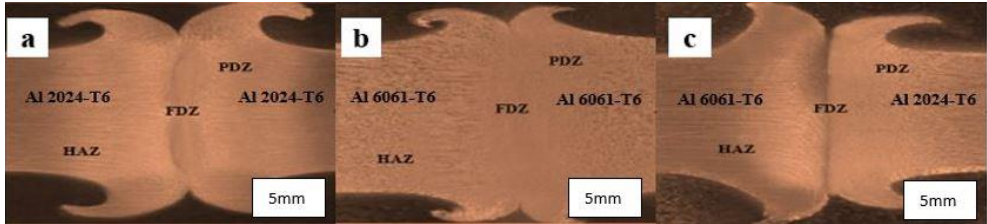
Macrostructures: (a) Similar welds 2024-T6,(b) Similar welds 6061-T6, (c) Dissimilar weld
